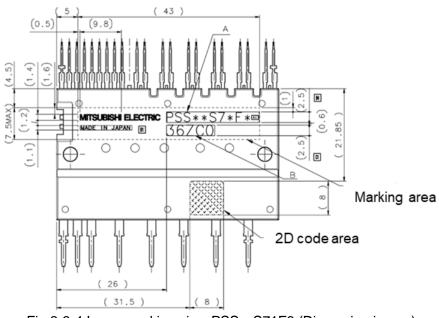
Laser marking view PSSxxS71F6 (Dimension in mm)
